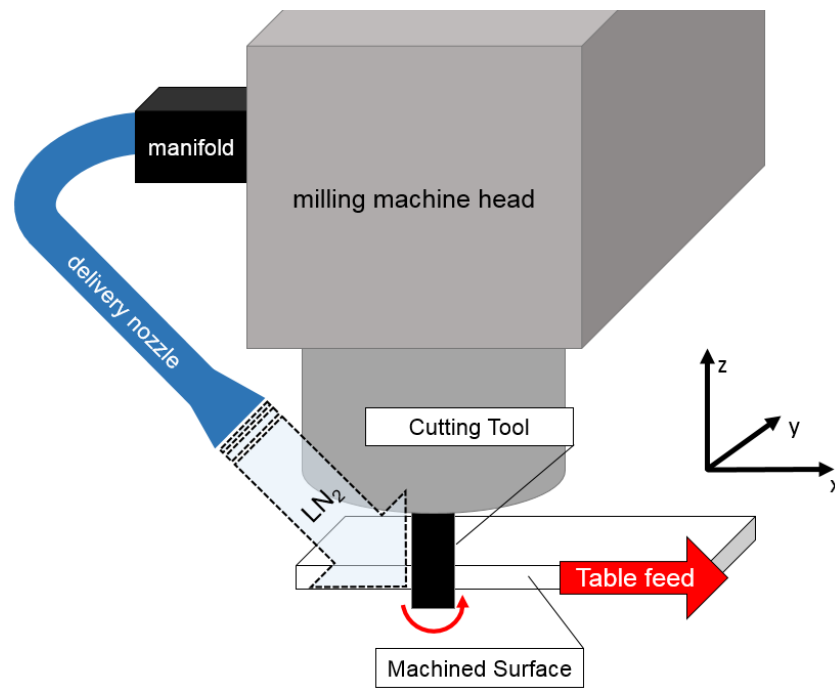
Schematic of cryogenic delivery method for side milling experiments. Liquid nitrogen is applied at an angle from the rake side of a milling cutter performing a conventional up-cut. In this manner, the tool and workpiece are kept cool while chips are effectively cleared away from the cut (Figure not to scale).
